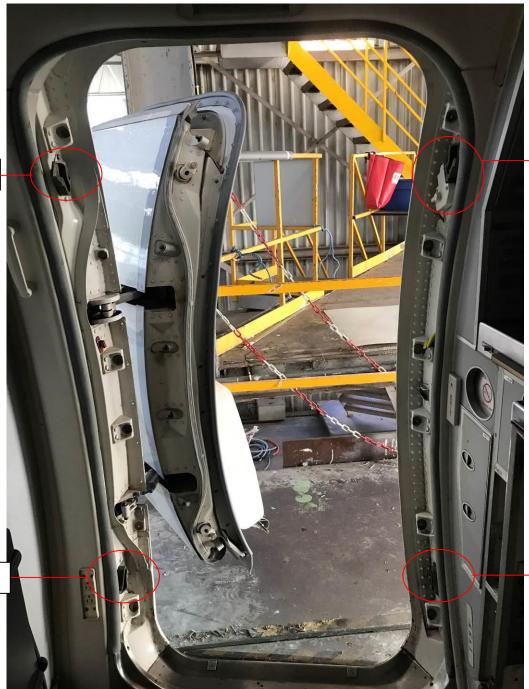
Door Bracket Locator Installation of Door Barrier Part no. 511CA29
